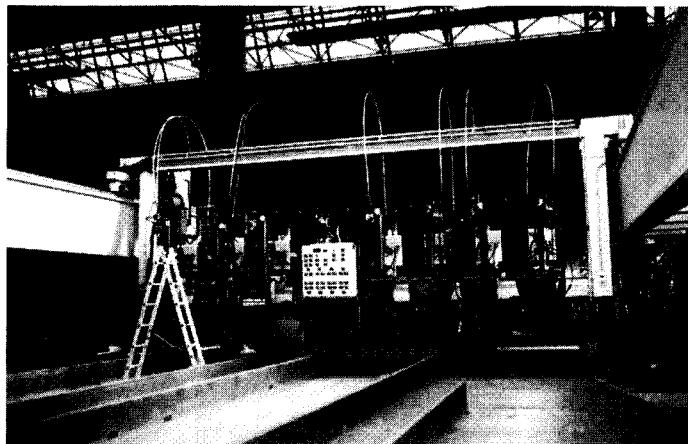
Flat Panel Line Workstation: Stiffener Welder
